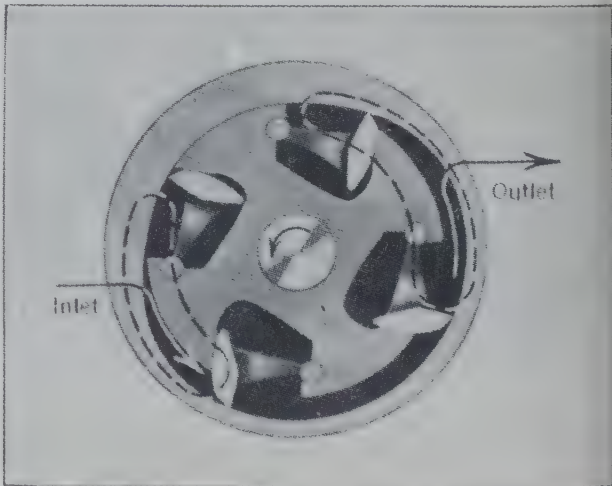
Cutaway view of end view of vane pump with bucket-vanes. (Blackmer Pump Co.)
